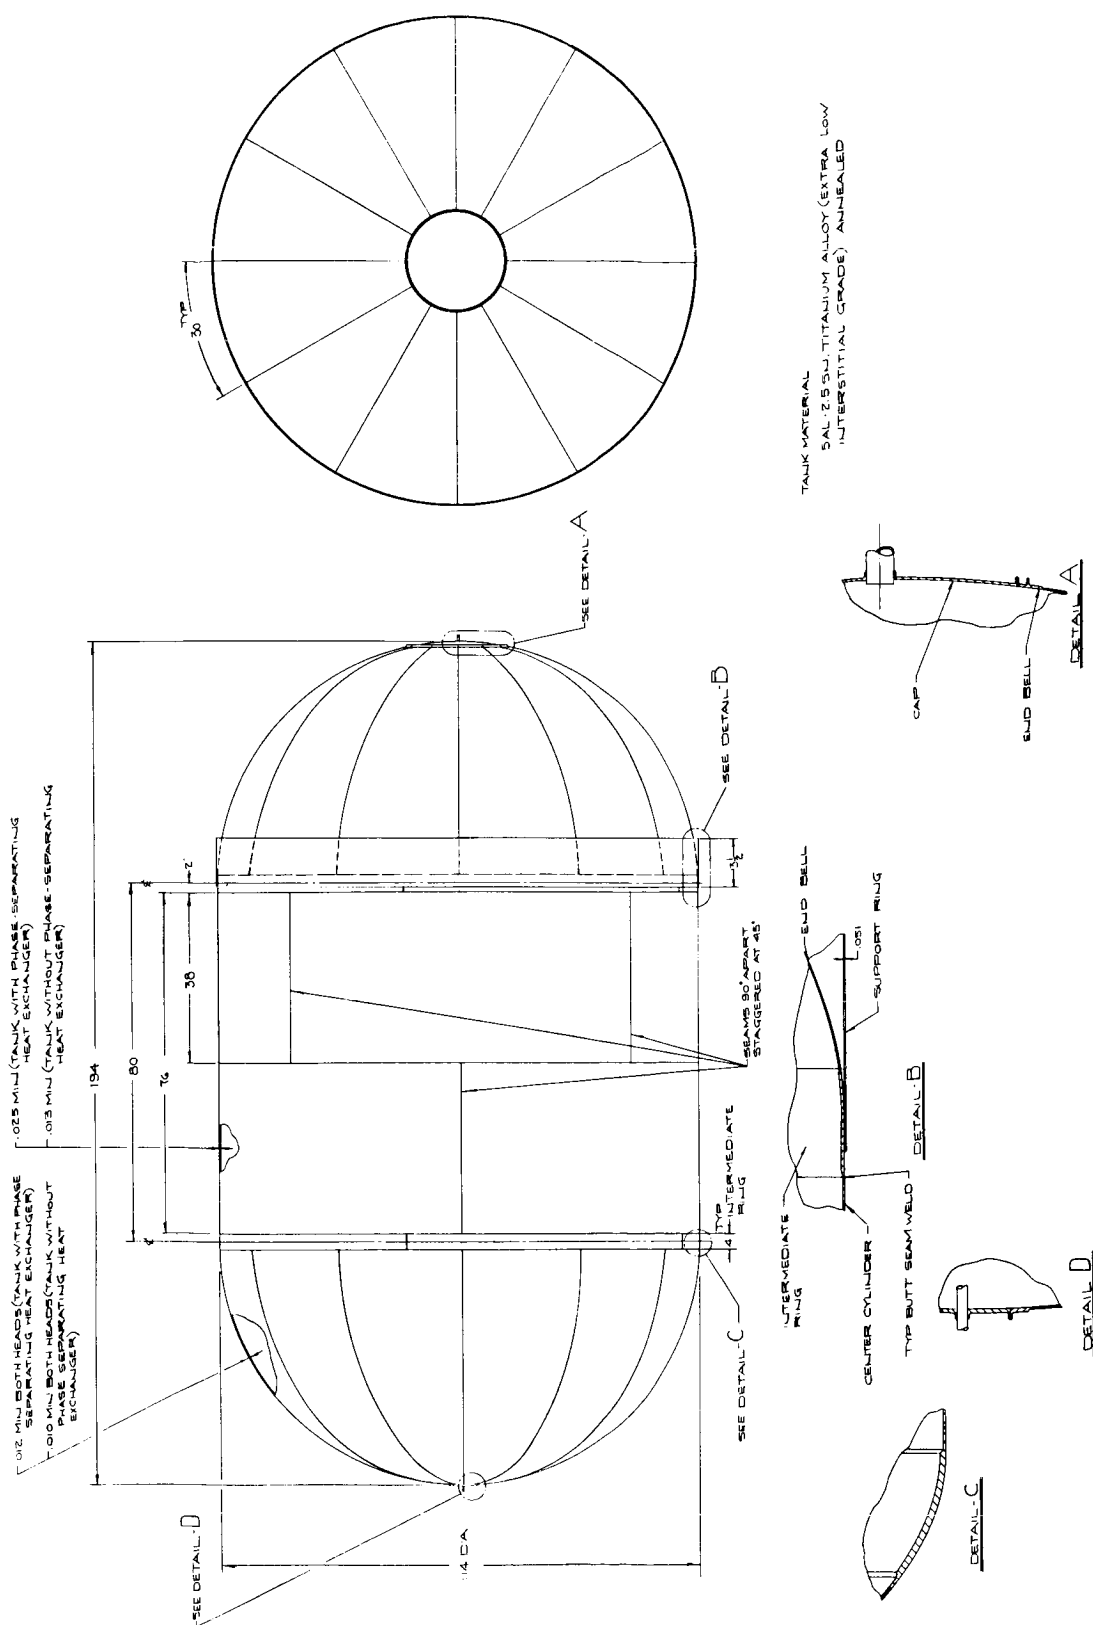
SHELL ASSEMBLY - HYDROGEN TANK
